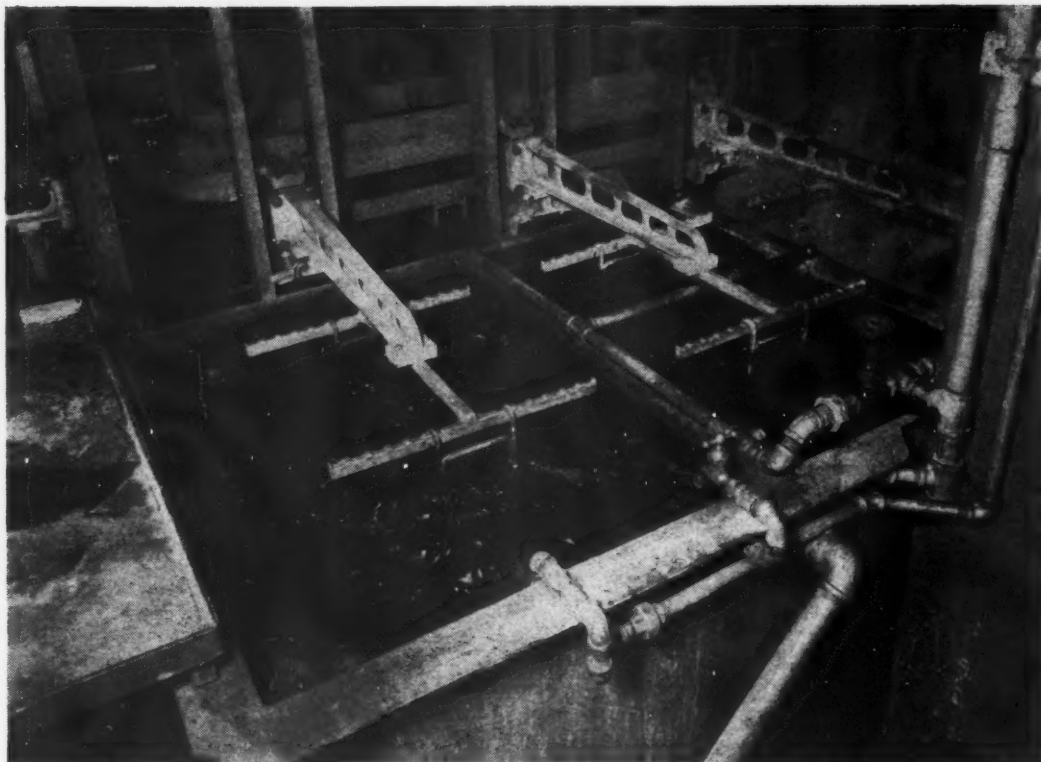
Closeup of two dip tanks of a H-VW-M full automatic conveyer, elevator type. Note detail of elevator mechanism and of elevator track supporting the roller skate of carriers.
